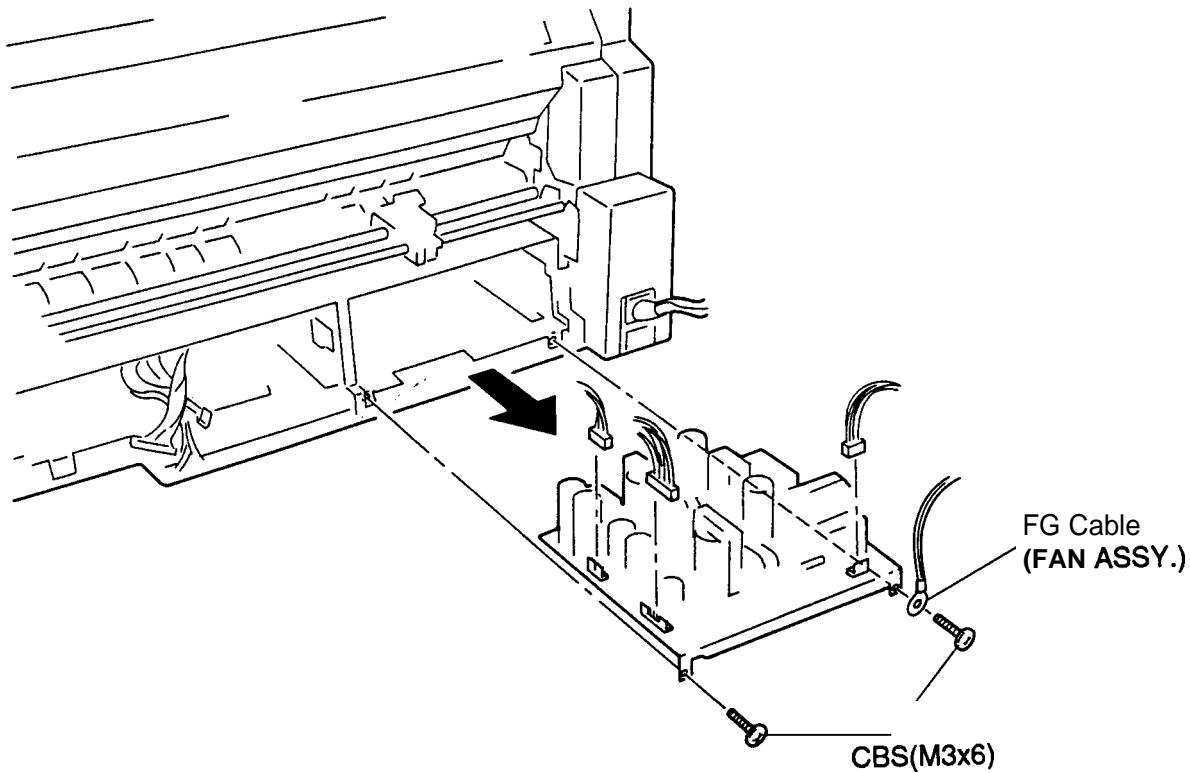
Removing the BOARD ASSY., POWER SUPPLY
